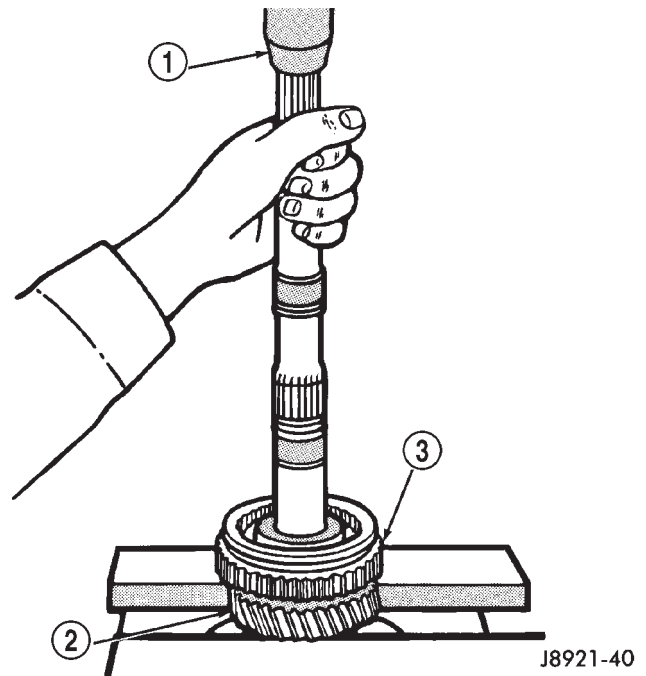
Second Gear, Reverse Gear And 1-2 Synchronizer
